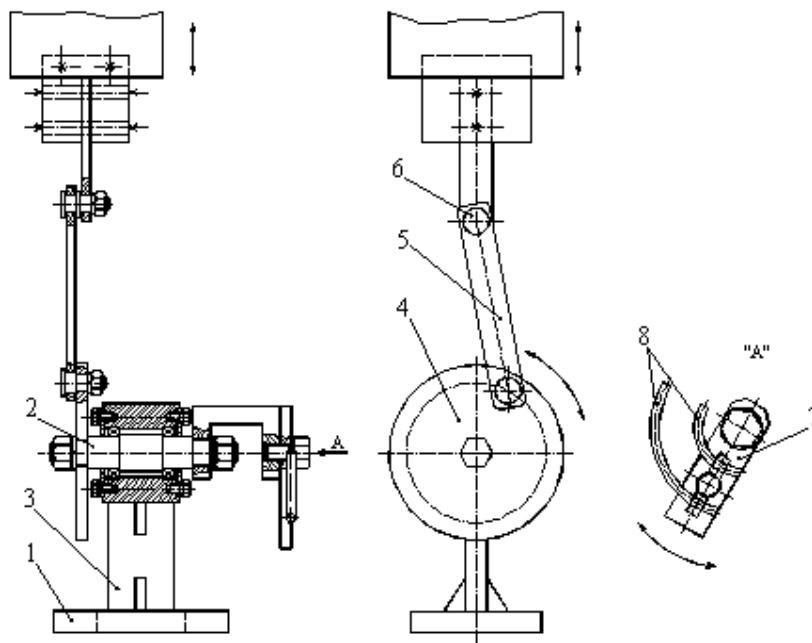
Solution to obtain circular axis holes by electrical discharge machining
